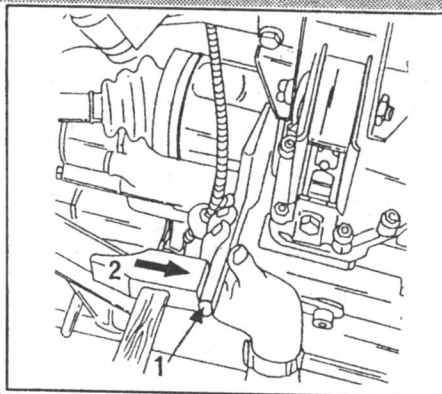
Removal of the L.H. drive shaft. Refer to text.
